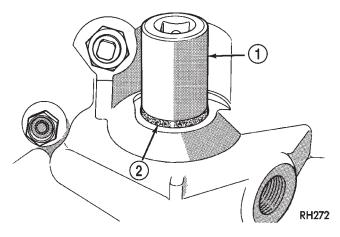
Installing Manual Lever Shaft Seal 1 – 15/16" SOCKET
